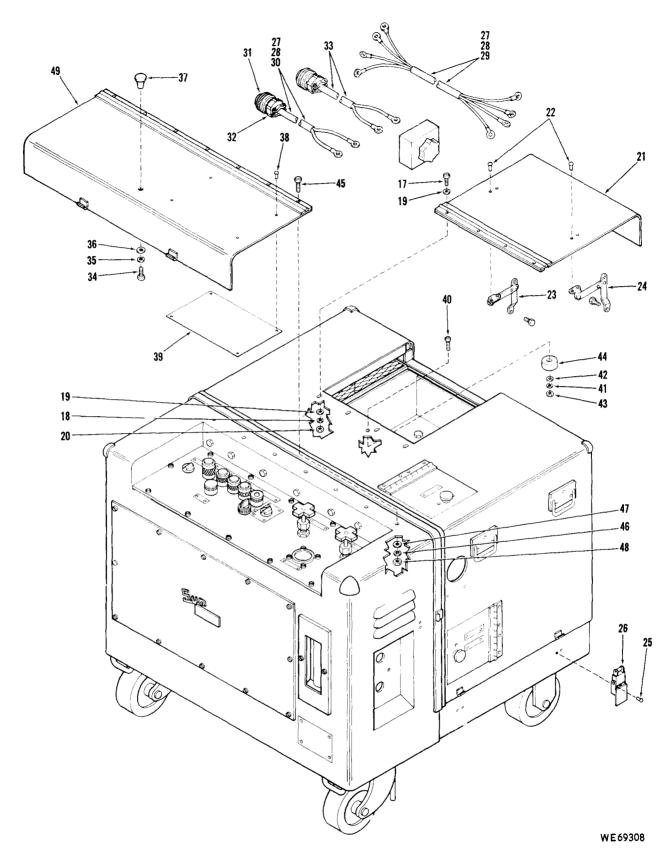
Portable, hydraulic / electric power supply: w / battery BB433A, HEPC-1, external group (sheet 1 of 2).
